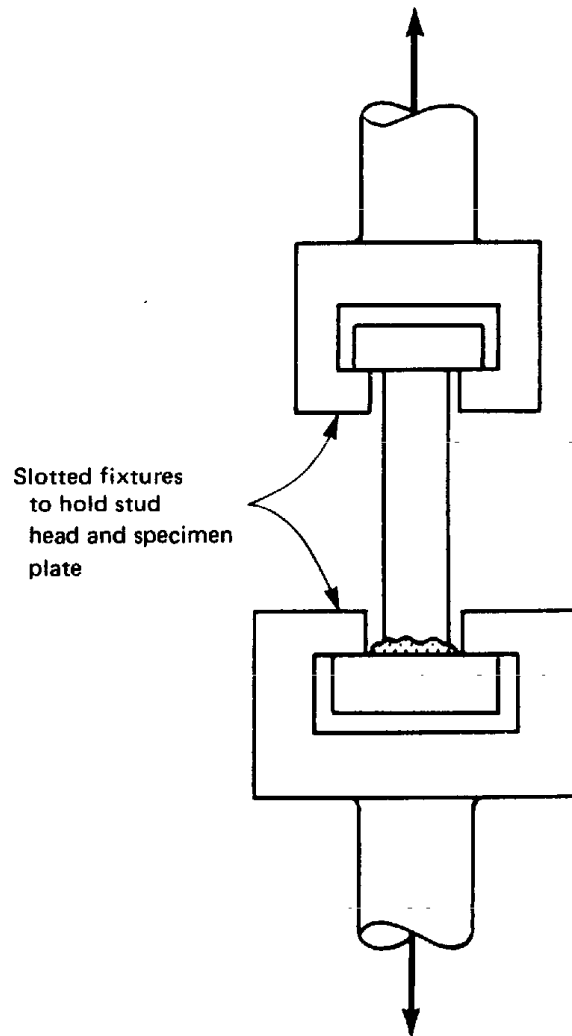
TYPICAL TENSILE TEST FIXTURE
